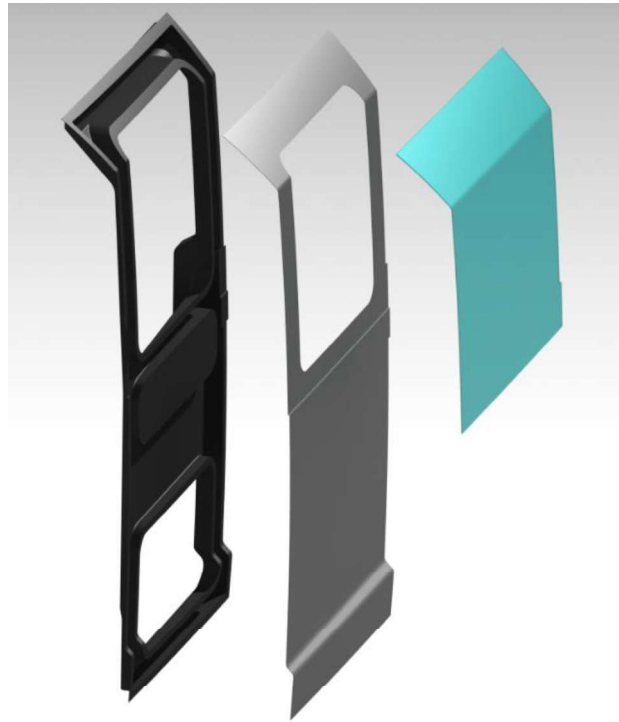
EXPLODED VIEW OF THE AUTOTAXI AND AUTOELF DOOR [26]
